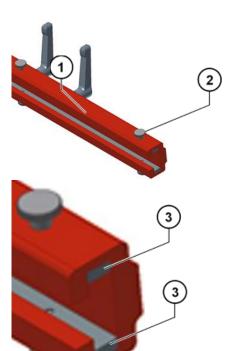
Mounting extension rail Denyer plus on OP-Table EU/US accessory rails
